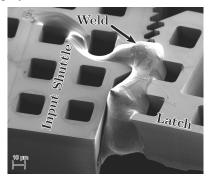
Silicon welding demonstrated on 50 µm device, courtesy of Adam Schofield
